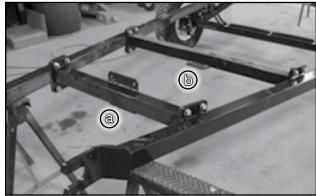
(a) Lift frame cross tube, (b) Hydraulic cross tube
